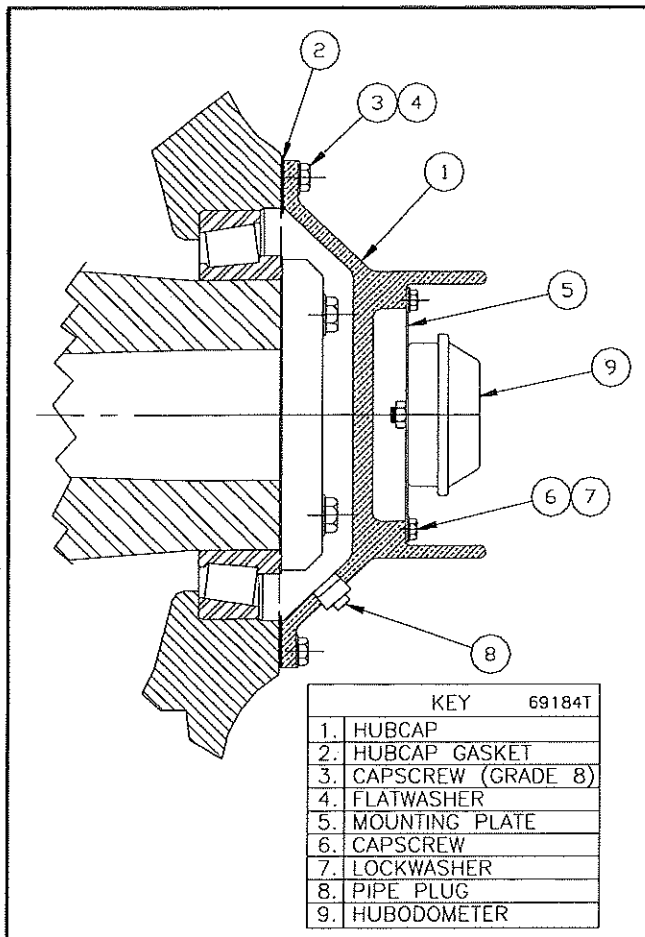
HUBODOMETER HUBCAP ASSEMBLY
